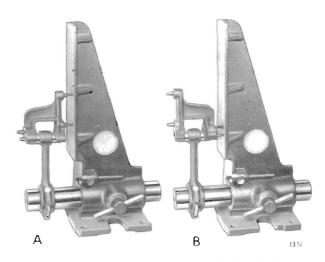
Checking connecting rod for bend and twist using tool No. S336-3
